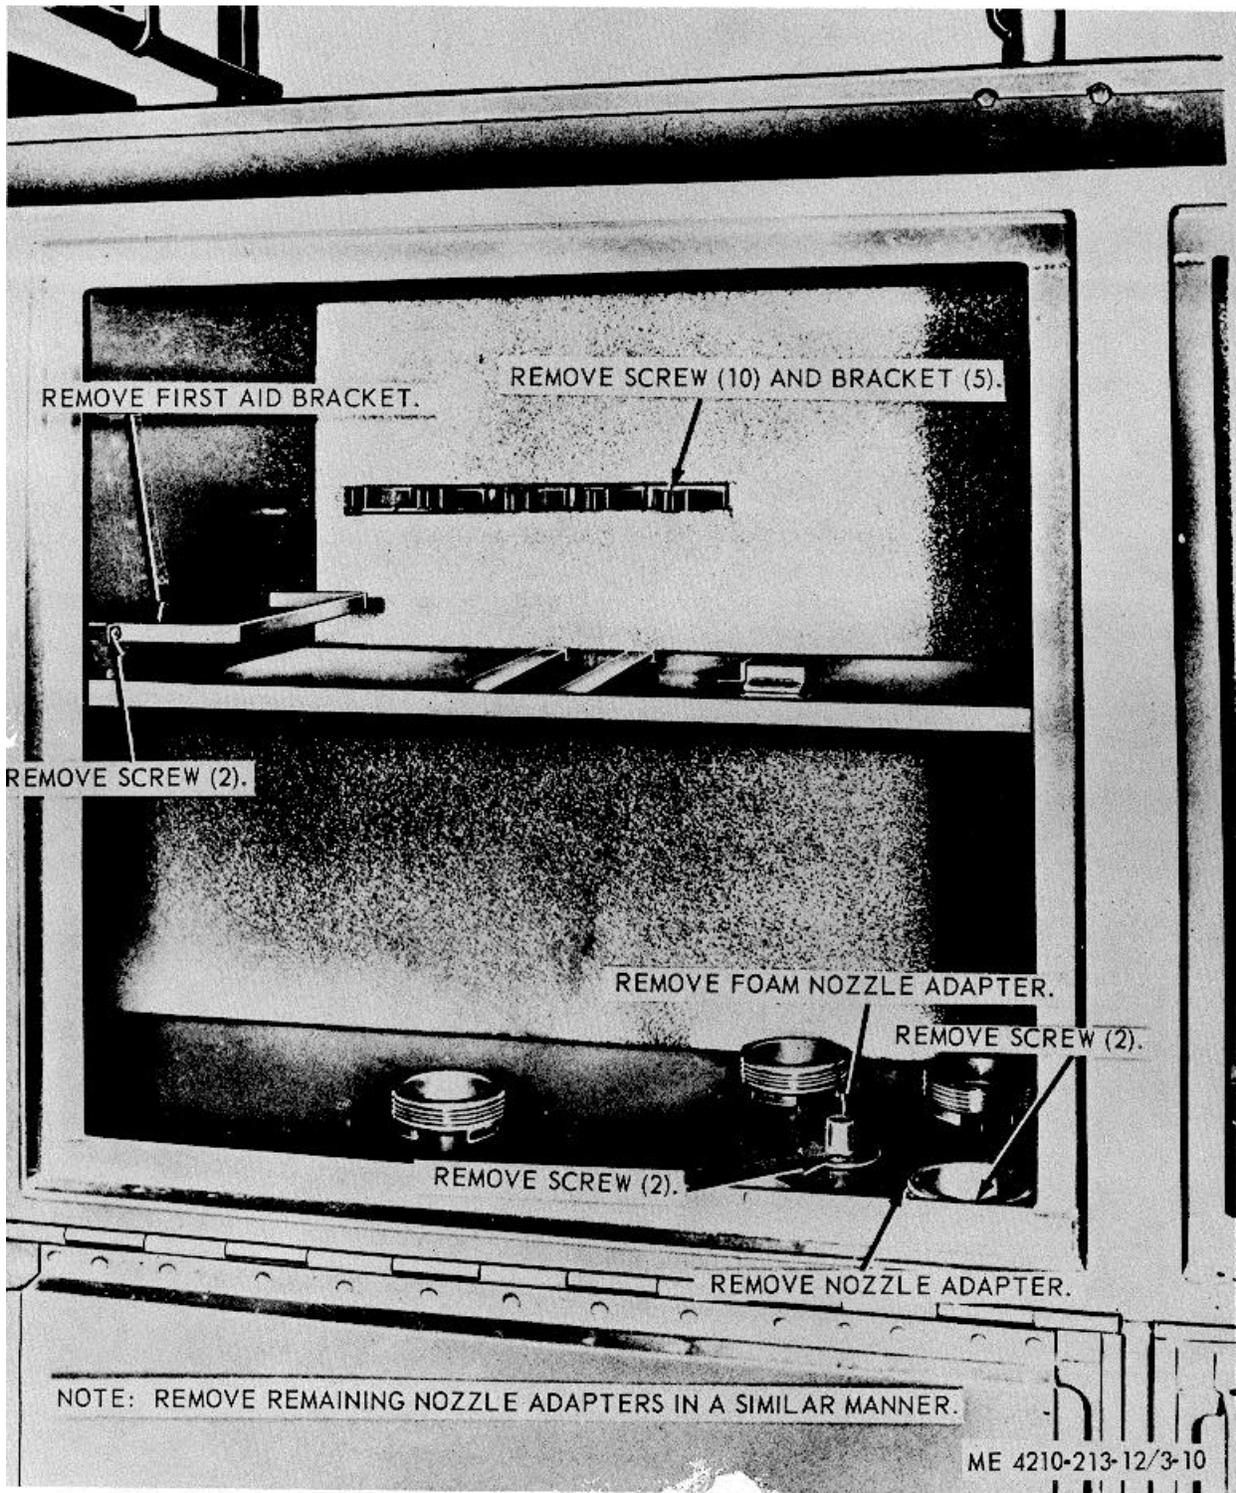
First aid bracket, hand lantern bracket fittings, removal and installation.
